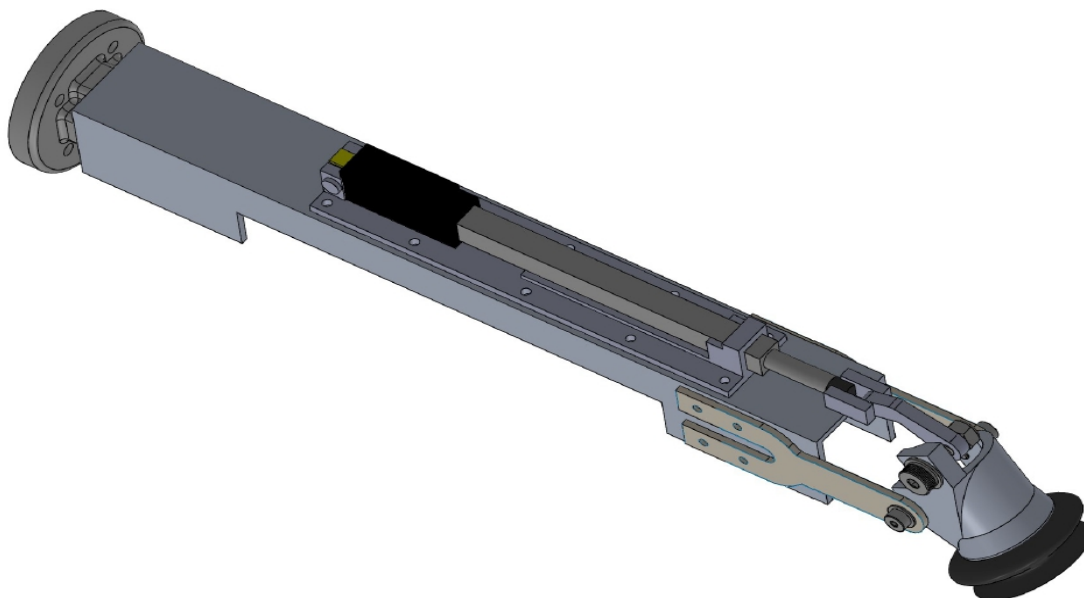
Final CAD model for 1 DOF suction gripper prototype.
